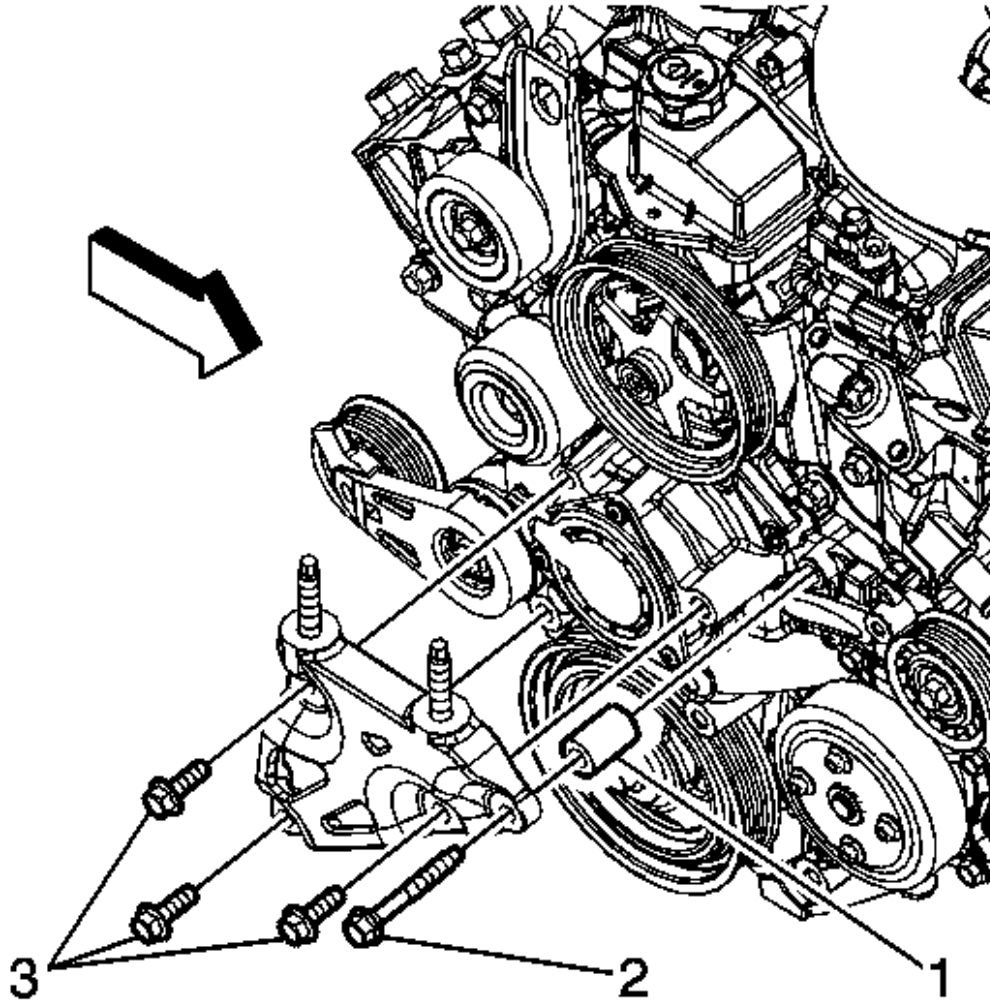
Engine Mount Bracket, Spacer & Bolts
